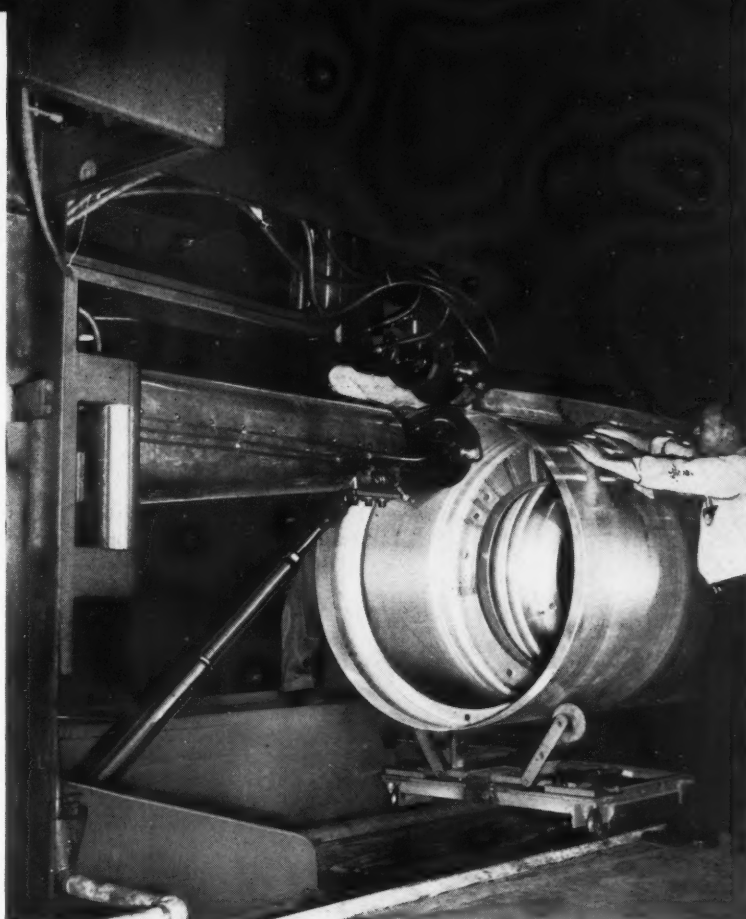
Close-up view of the Federal seam-welding machine, Fig. 2, which has a throat 60 inches deep for welding large fuel tanks
